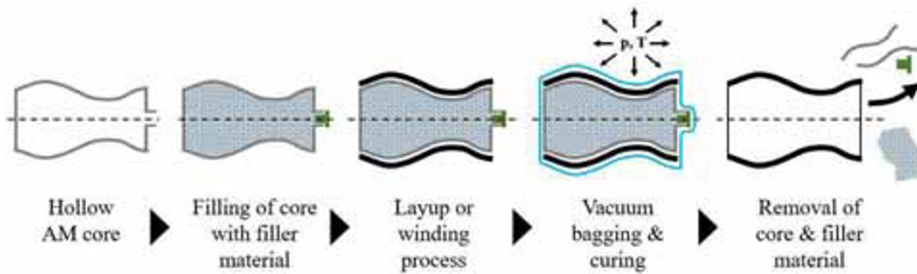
Manufacturing route for the production of hollow composite structure using removable, AM break-out core that is filled with filler material during processing (adapted from [1]).
